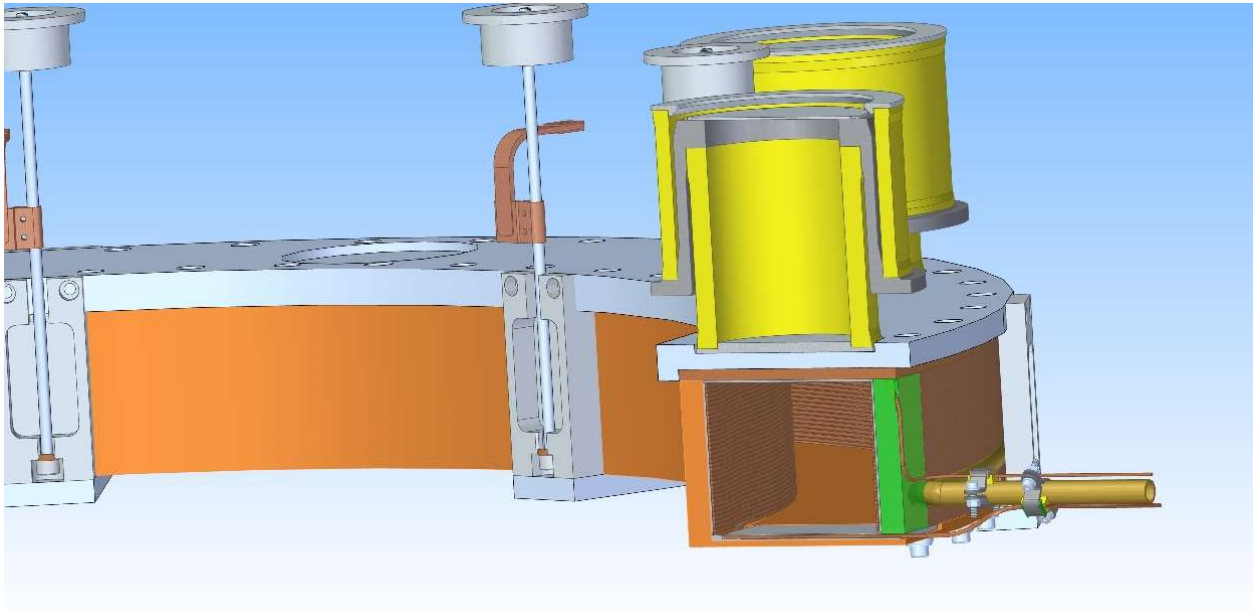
The stainless steel plate and the copper case assembled by using bolts. The support struts and the suspension rods are also attached.
